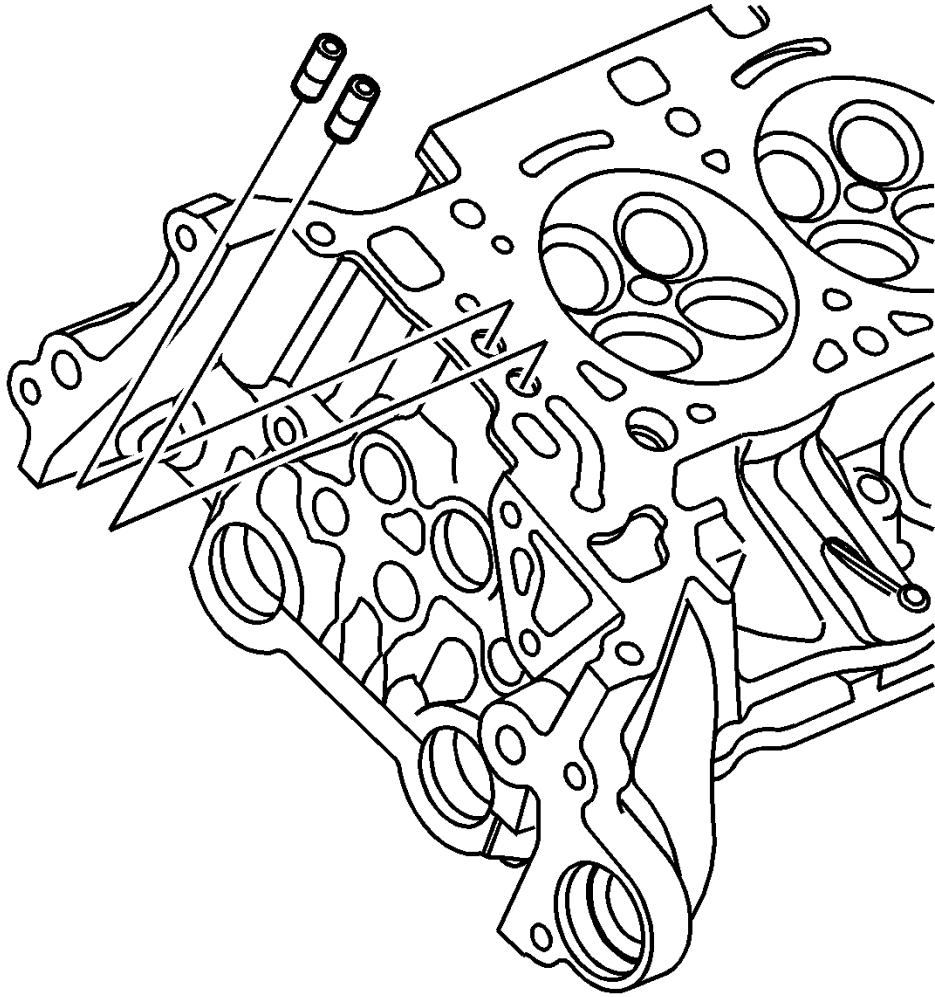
Cylinder Head Oil Gallery Expansion Plugs
